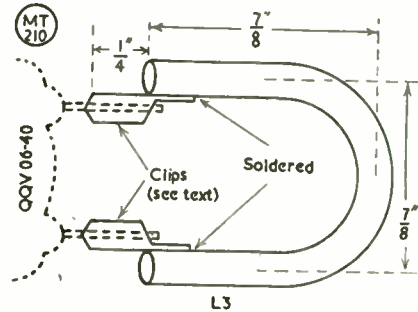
Detail of the dimensions for the plate tank L3, permeability tuned by means of a copper disc about the size of a halfpenny and mounted on a screwed rod; the disc "looks" into the U-shaped tank coil.
